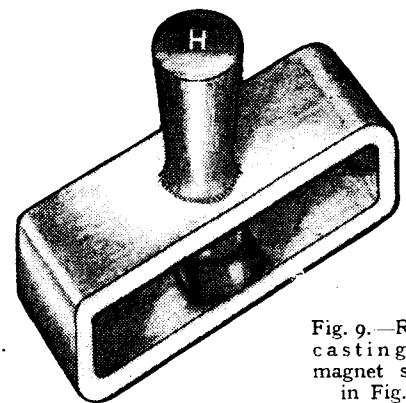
Rough casting for magnet shown in Fig. 8.
